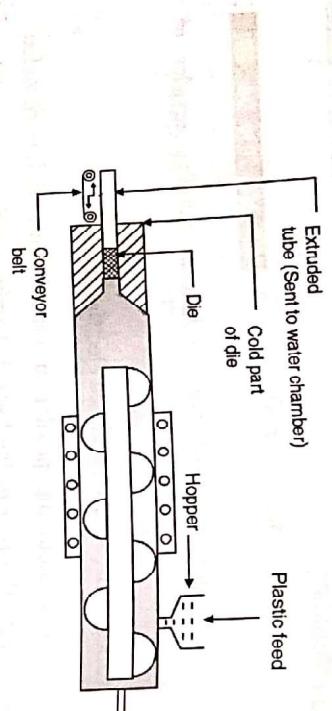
Moulding of tube by horizontal extrusion moulding
